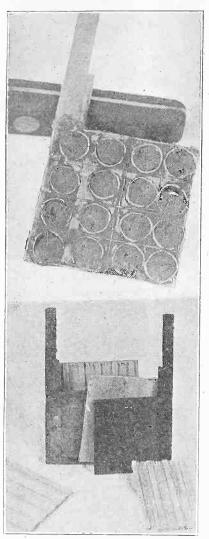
, top, shows a close-up of the plate holes plugged up with the paste. Small pieces of thin wood are cut and placed between the plates. These pieces of wood are shown in the lower photo, Fig. 10.
